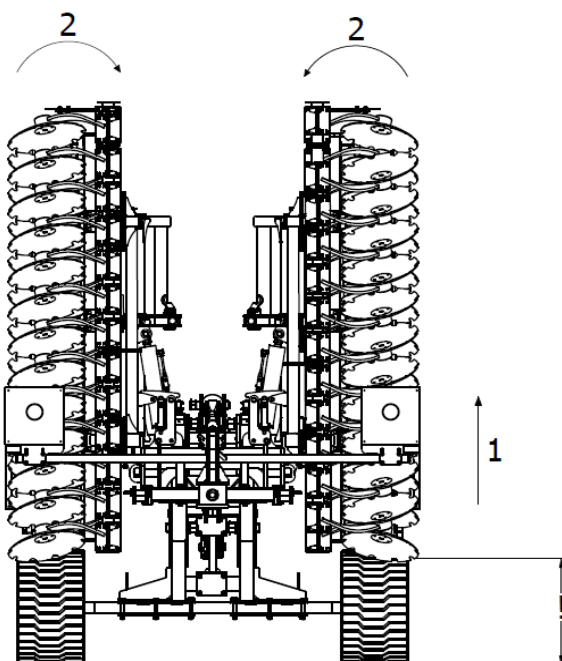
Machine opening sequence: 1- lift the machine up to its maximum, 2- fold the machine wings into the "closed" position.
